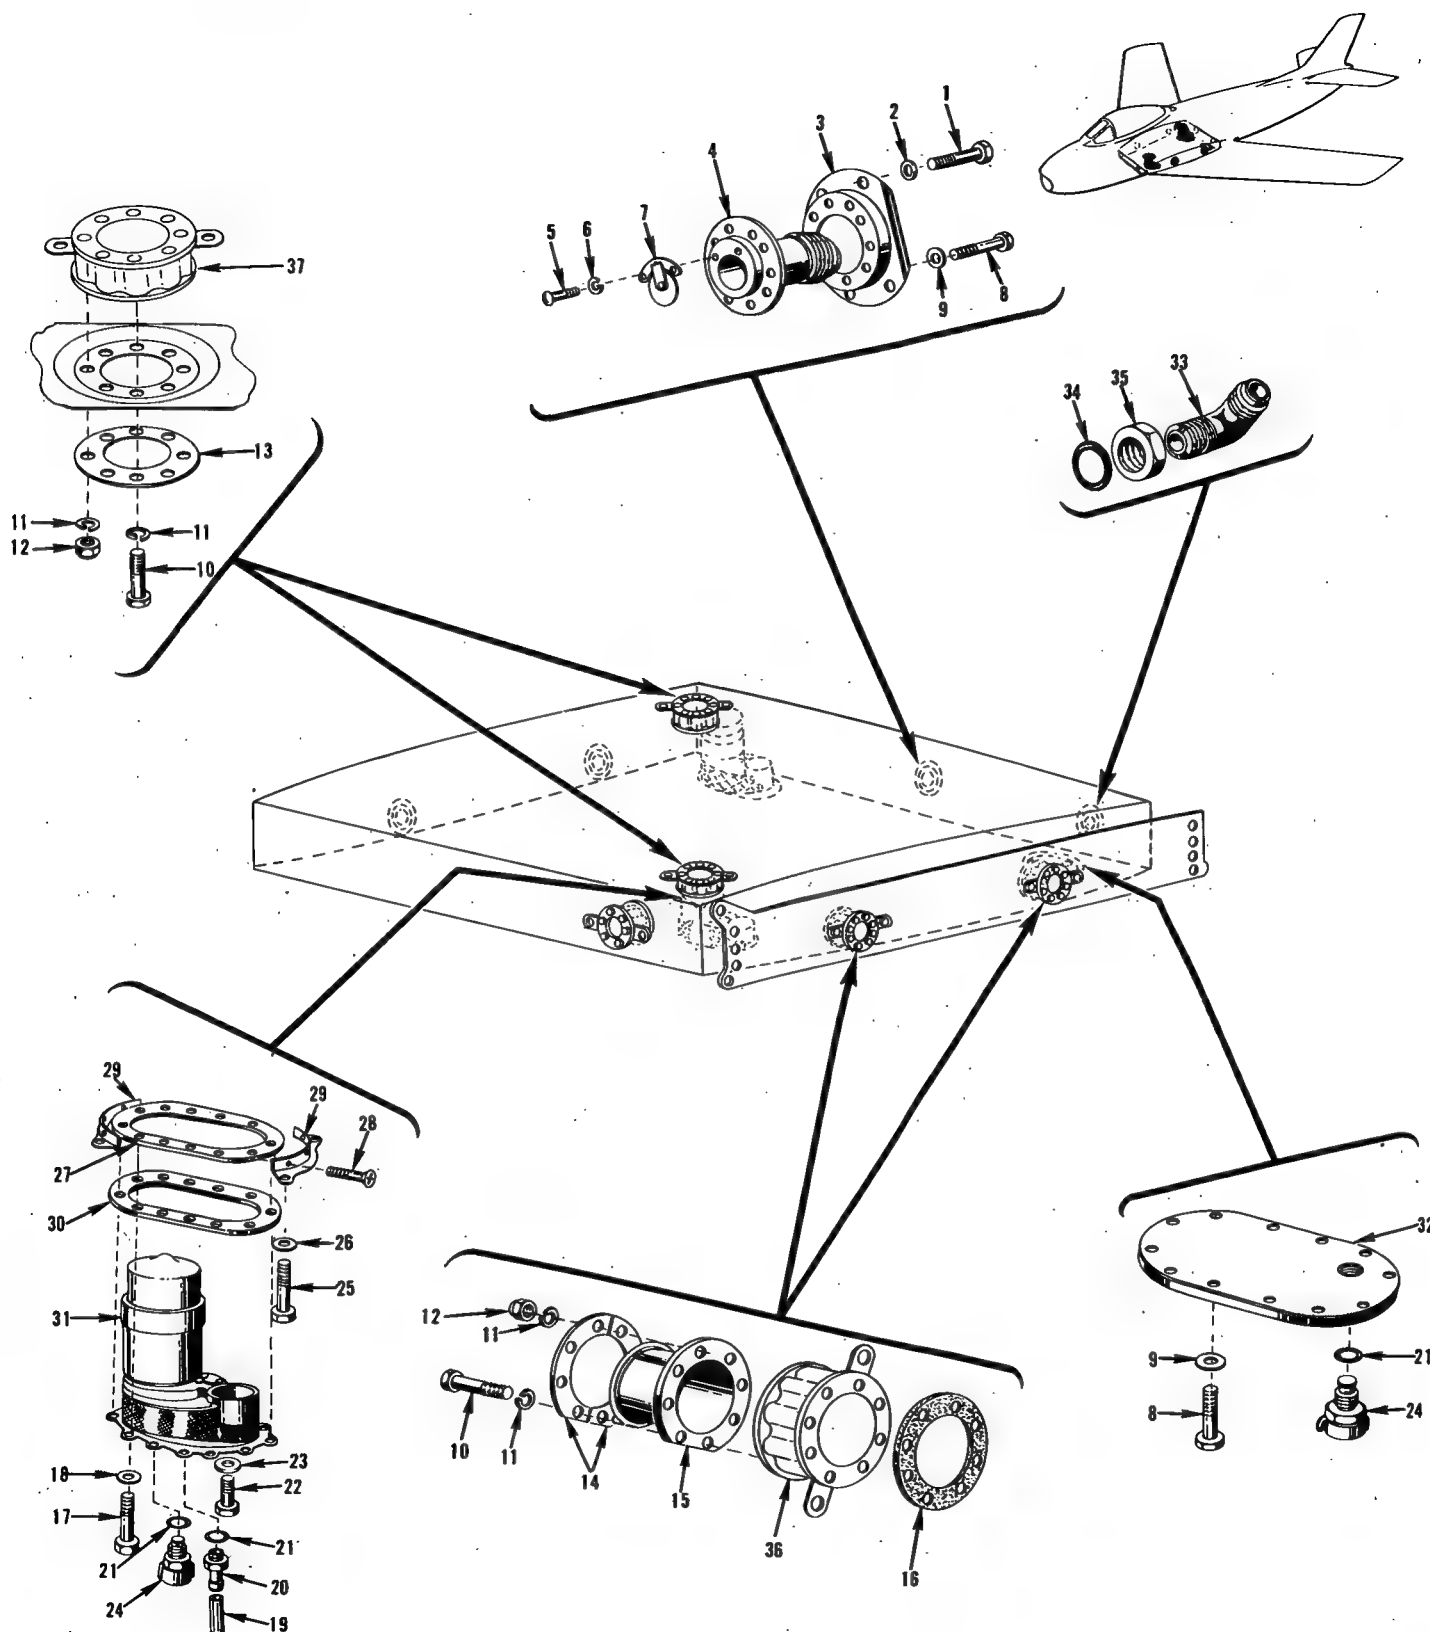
CENTER WING FUEL CELL ACCESSORIES
